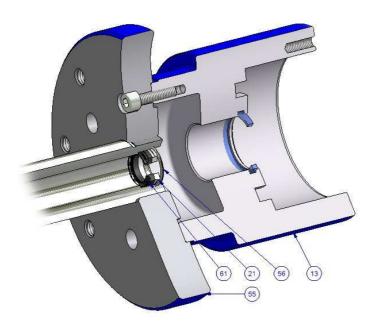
Sub-assembly comprising Piston/Catchplate/Sample Tube
